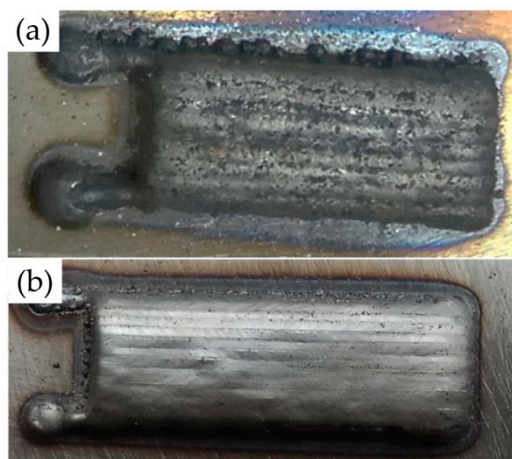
Surface morphology of samples (a) before and (b) after laser remelting.
